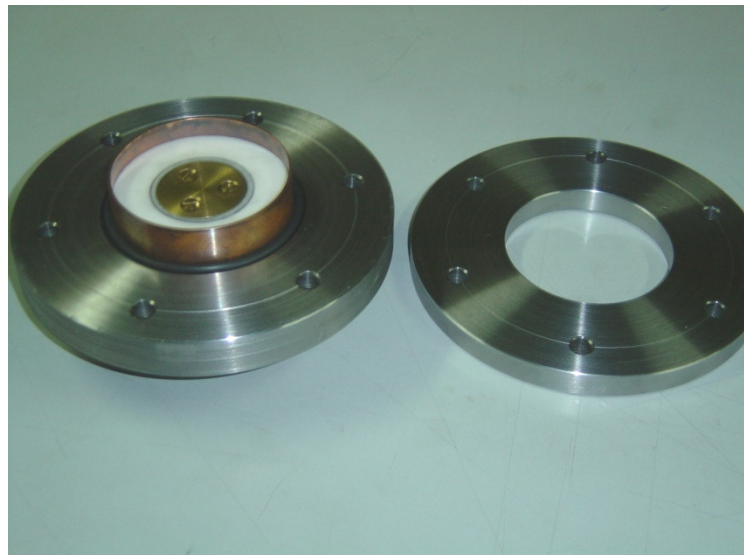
Part assembly of ceramic to metal brazed joint leak detection fixture
